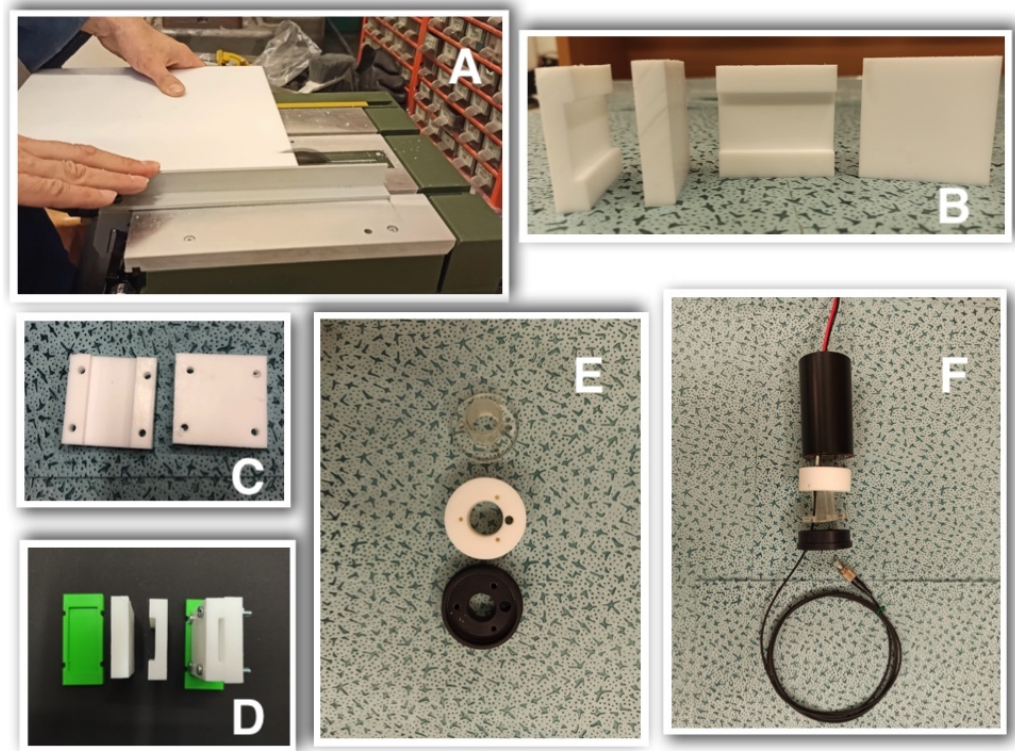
Pictures of teflon preparation: cutting of the teflon slabs to 5 cm $\times$ 5 cm pieces (A), detail of the smaller pieces (B), teflon pieces after drilling (C), assembly of the mould used for gluing (D), cap of the PMT case after drilling (E), illustration of the placement sequence inside the PMT case (F).
